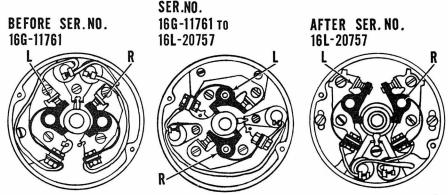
Three types of alternator and ignition units have been used as shown above. The earliest unit (left) is driven at 1/2 crankshaft speed and has two lobes on ignition cam. Later types (center and right) are driven at same speed as crankshaft and ignition cam has only one lobe. On all types, breaker points for left cylinder is shown at (L) and breaker points for right cylinder at (R).
